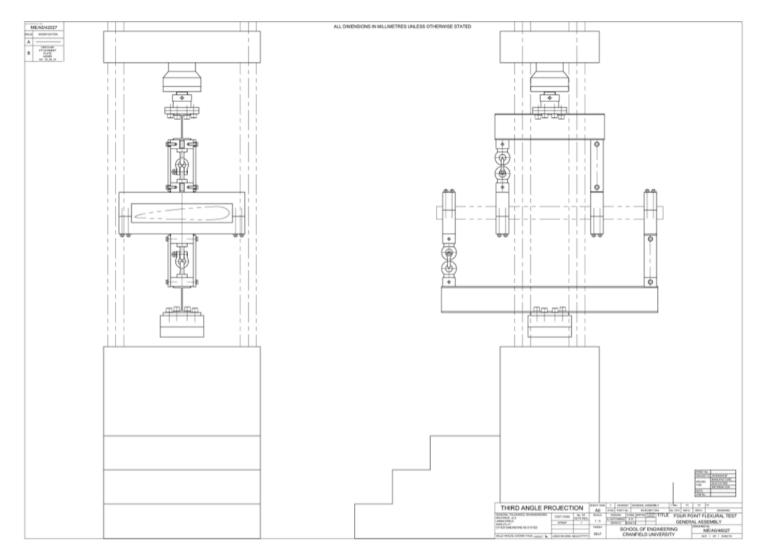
Test fixture fitted to 1MN Mayers servo-hydraulic machine (Hutchins, 2012)
